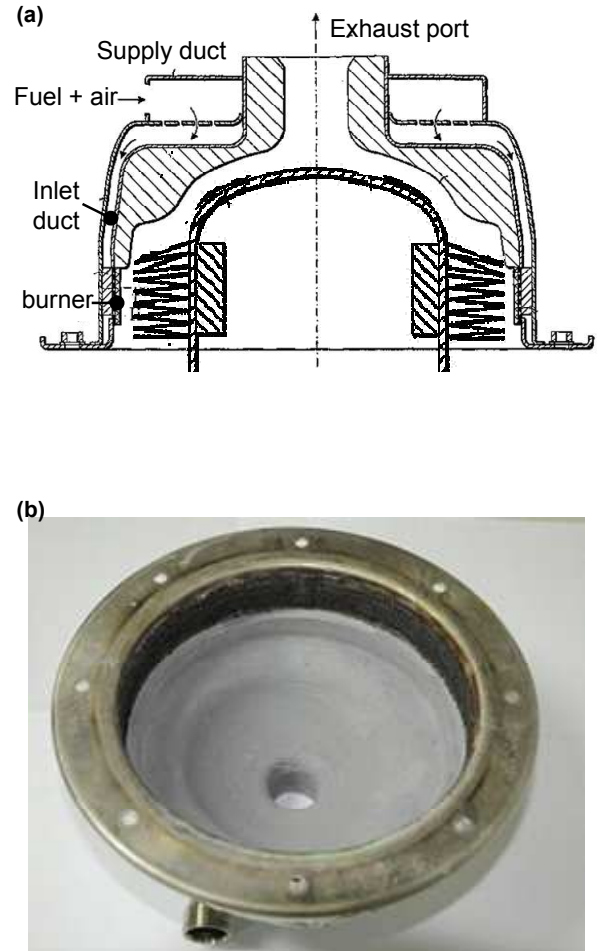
Burner for the 1 kW class Stirling engine; (a) Cross-section schematic; (b) Photograph
